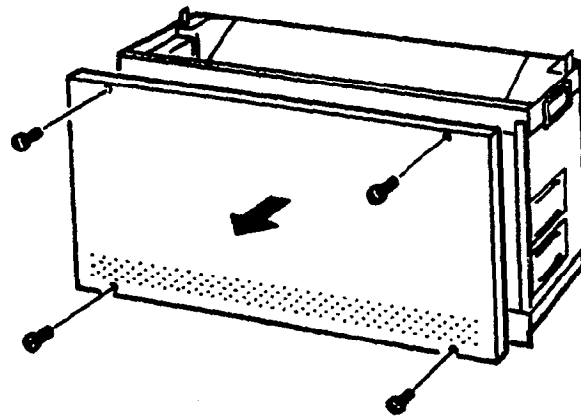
Removing the Level II Advanced Expansion KSU Front Panel
